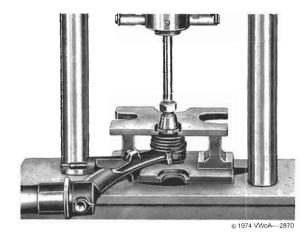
Ball joint being pressed loose from eccentric camber adjusting bushing. Note the nut installed on the ball joint stud. This nut will keep the ball joint from flying out suddenly.
